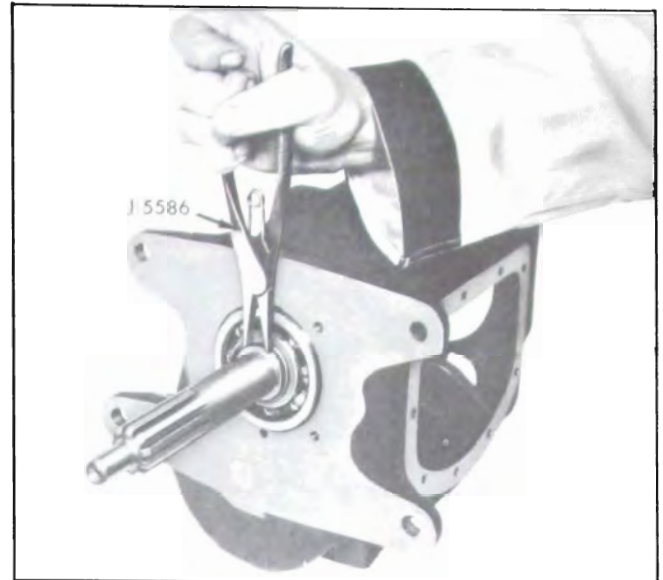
Removing Main Drive Gear Retaining Snap Ring
